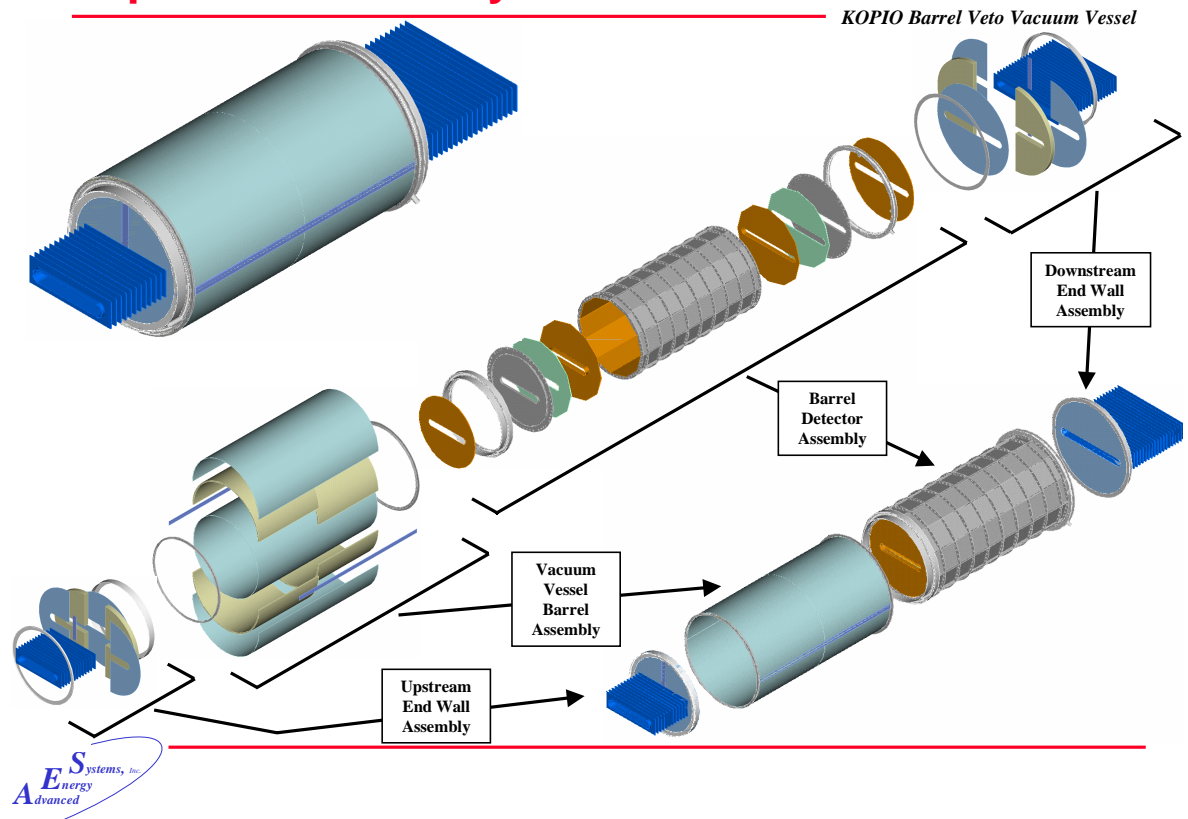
Exploded view of construction of the decay region vacuum vessel including the charged particle veto, *i.e.*, Barrel Detector Assembly.
